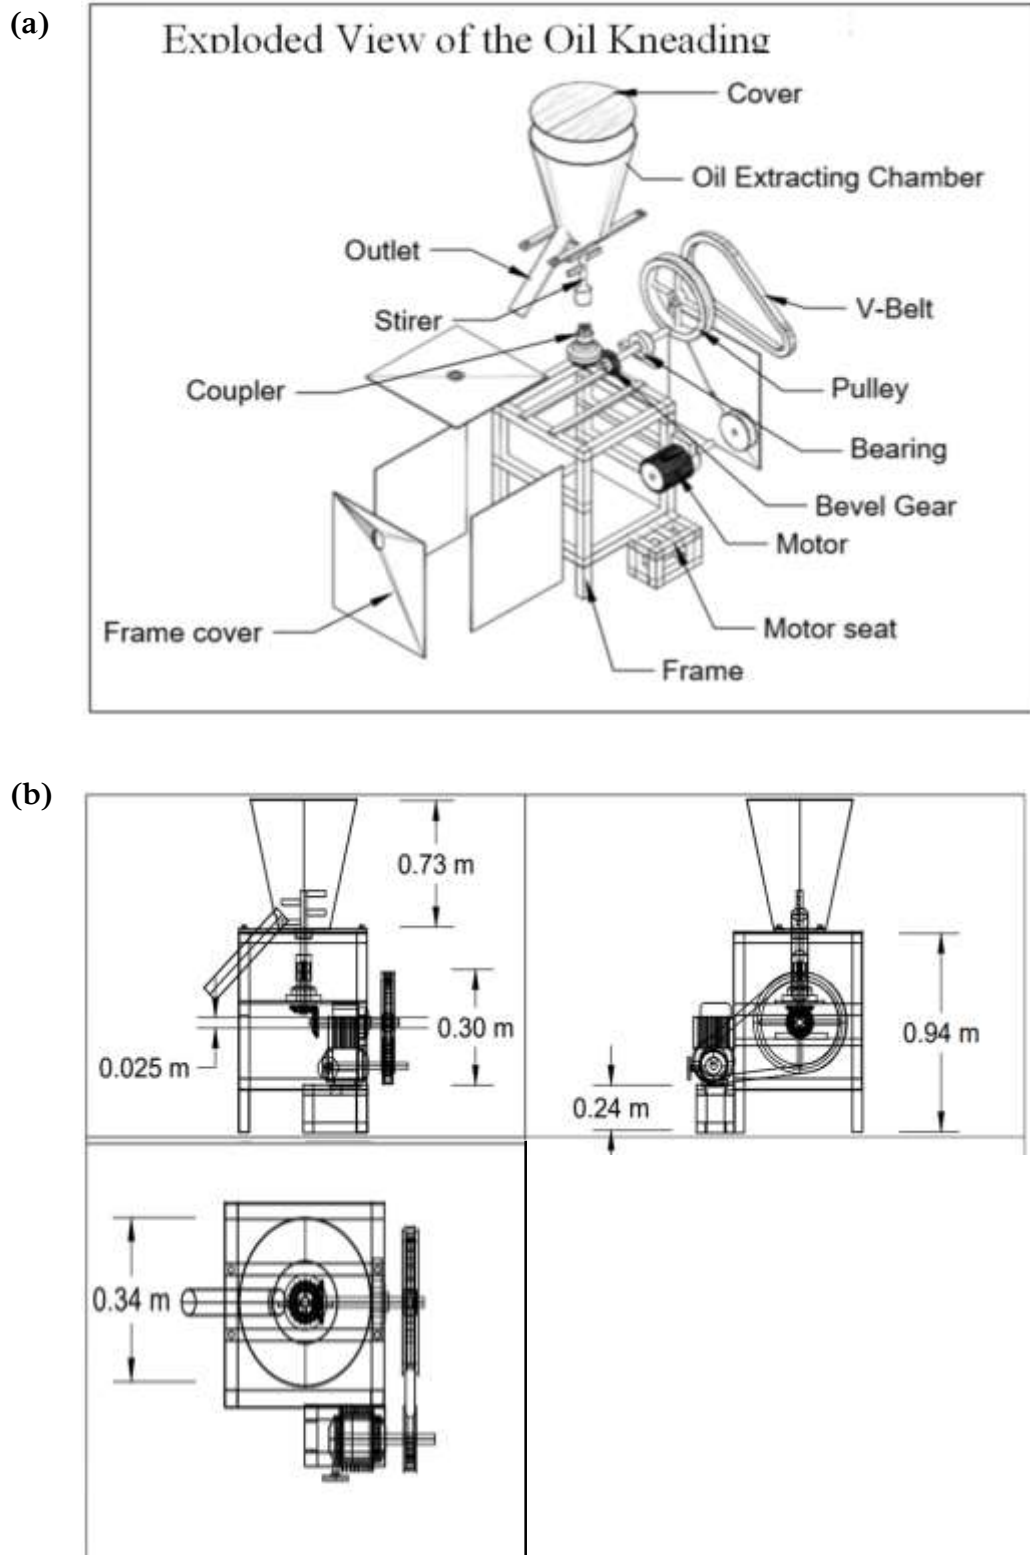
Orthographic view (a); Exploded view of motorized groundnut paste kneading machine
